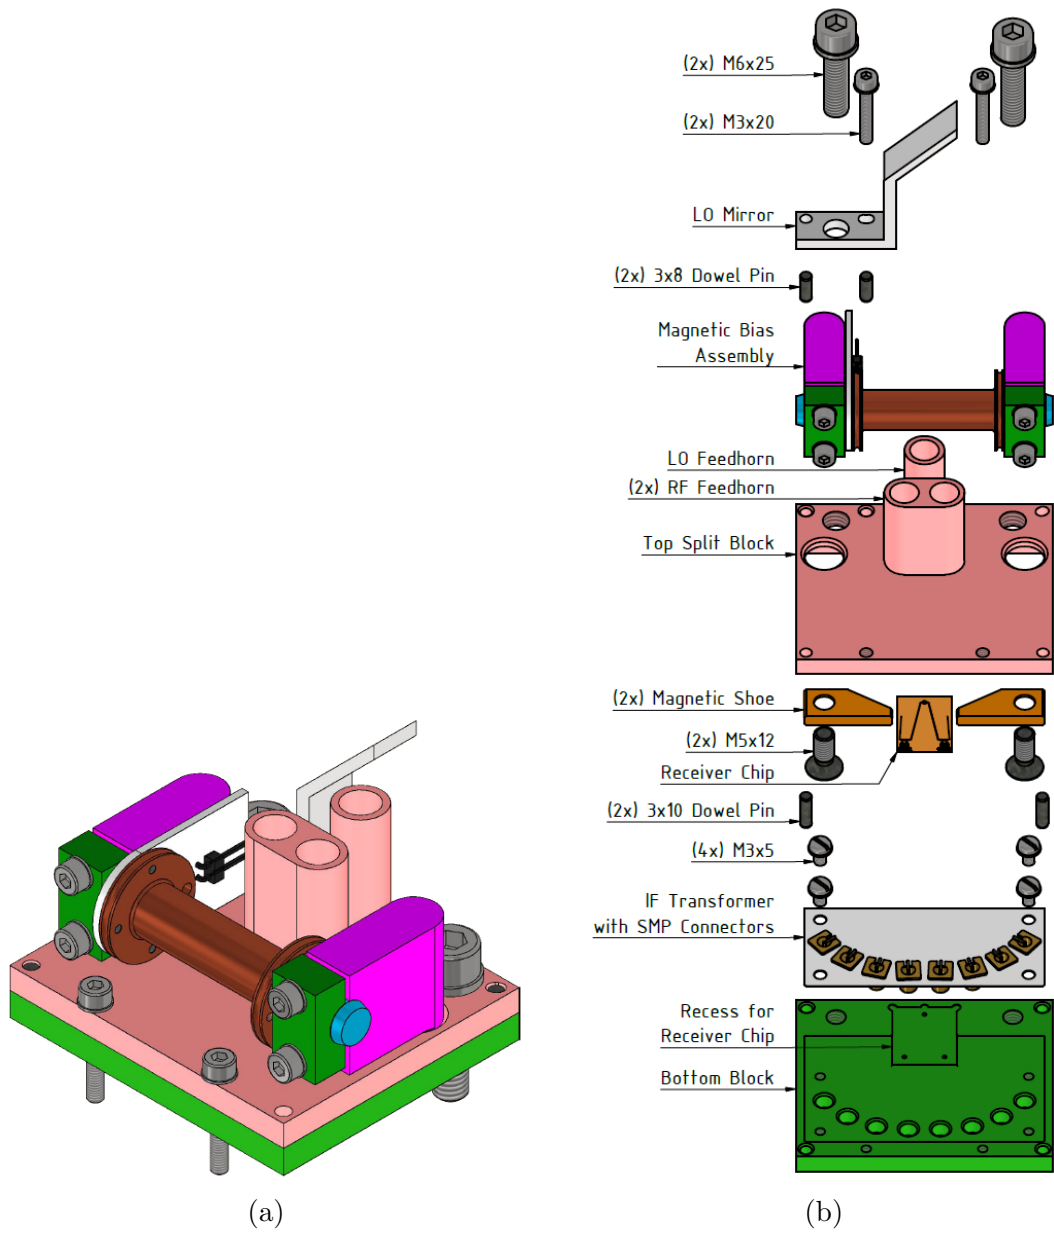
The (a) assembled receiver block and (b) exploded view with all required components.
